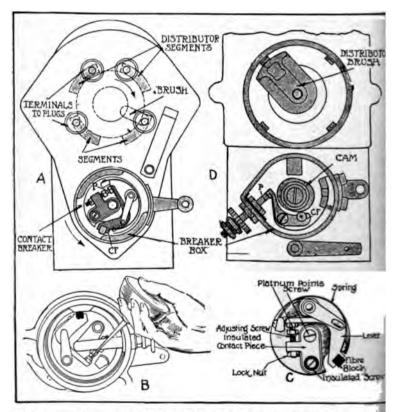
Illustrating Methods of Adjusting and Caring for Magn Contact Breakers.
